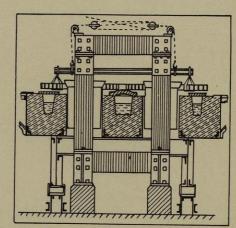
Sectional elevation of Hiorth 5-ton Furnace at Jossingfjord.
